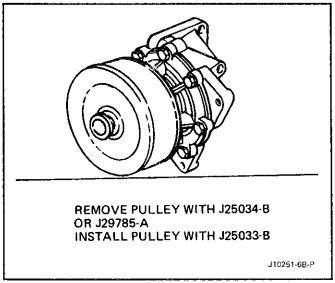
Removing and Installing Water Pump Pulley — 2.5L
